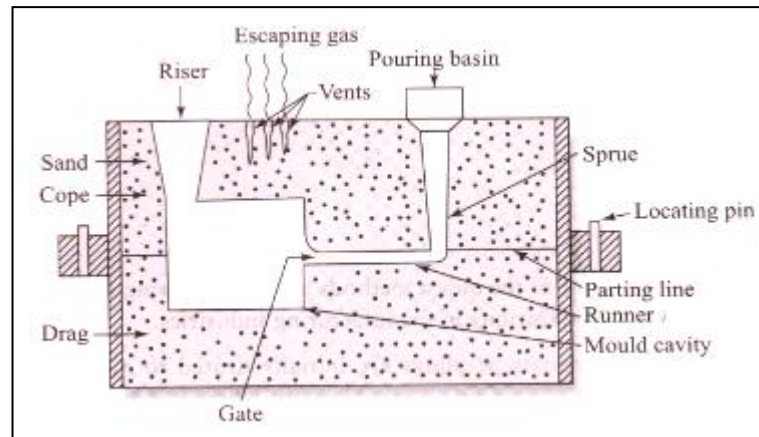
Schematic illustration of sand mold (Singh, 2008).
